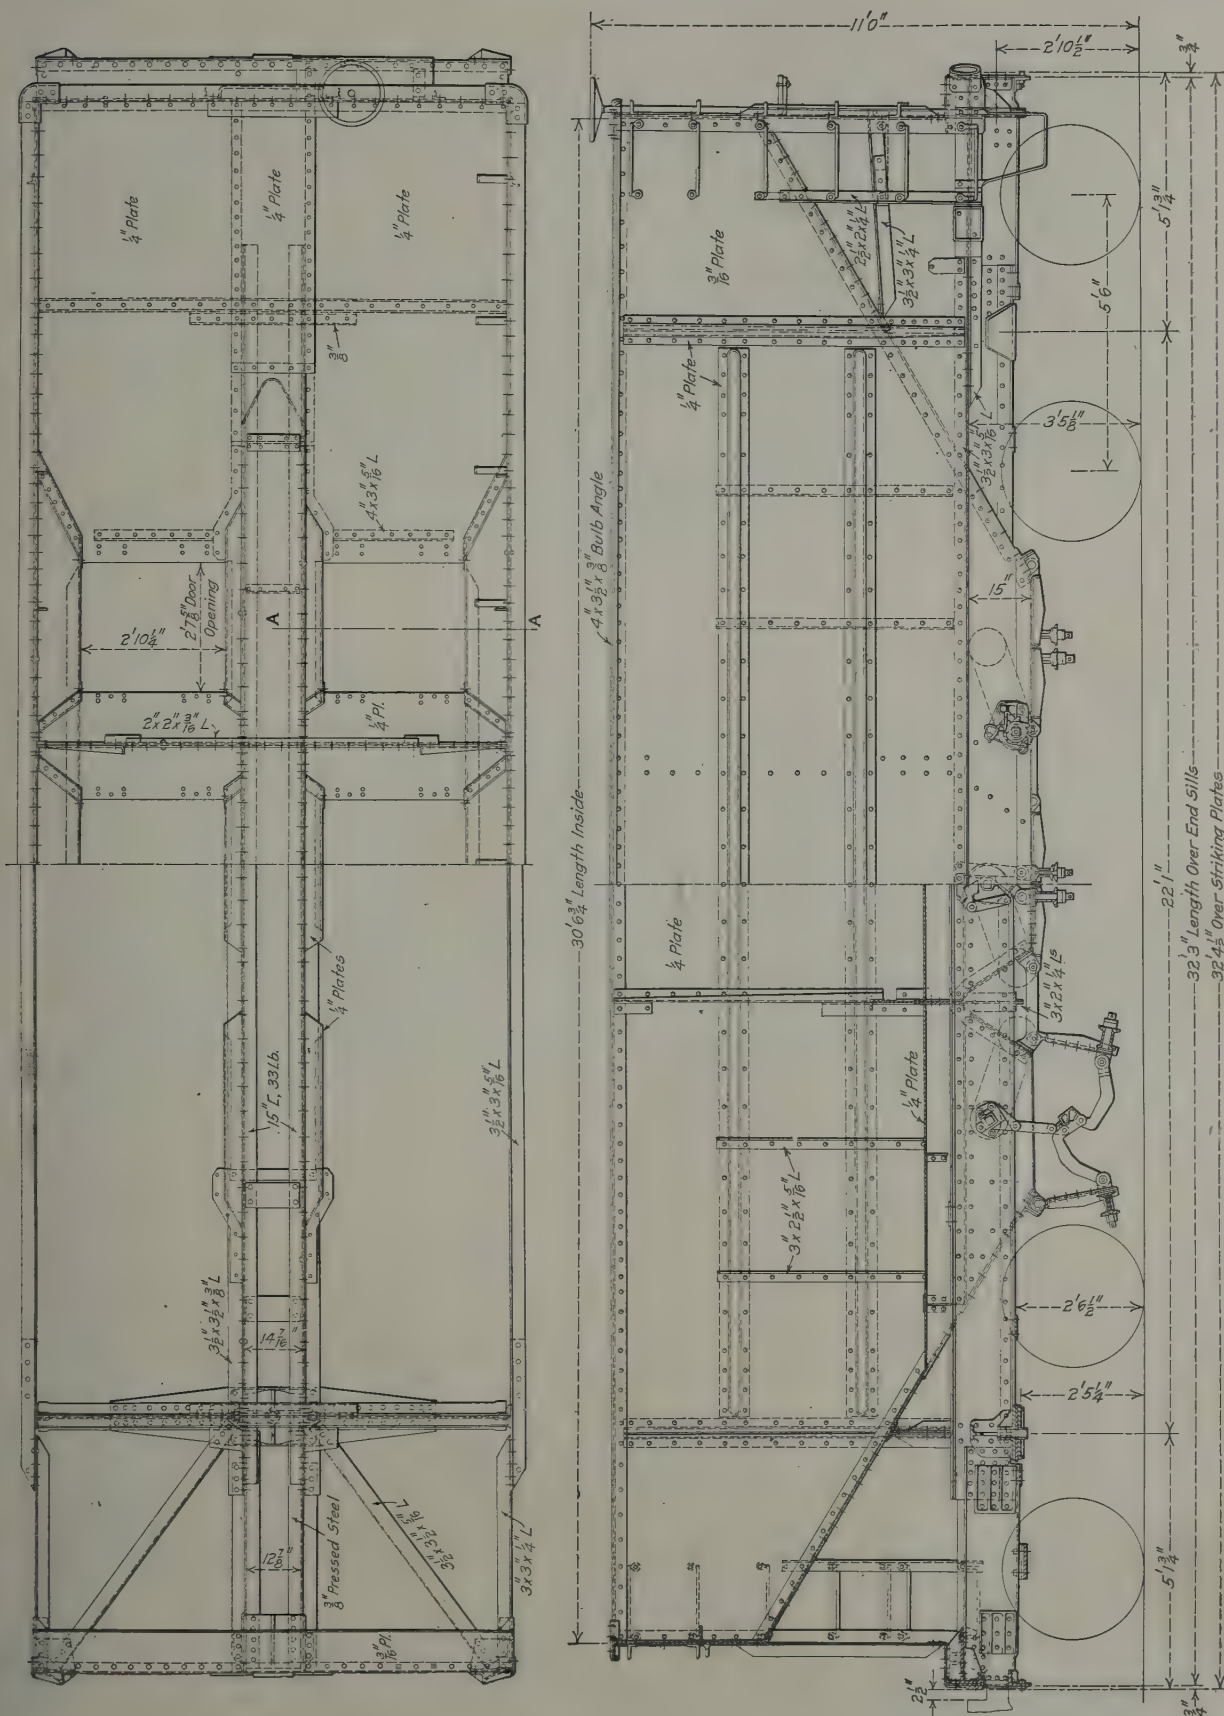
Plan and Elevation of All-Steel 50-Ton Hopper Car Shown in Figs. 64-65.
